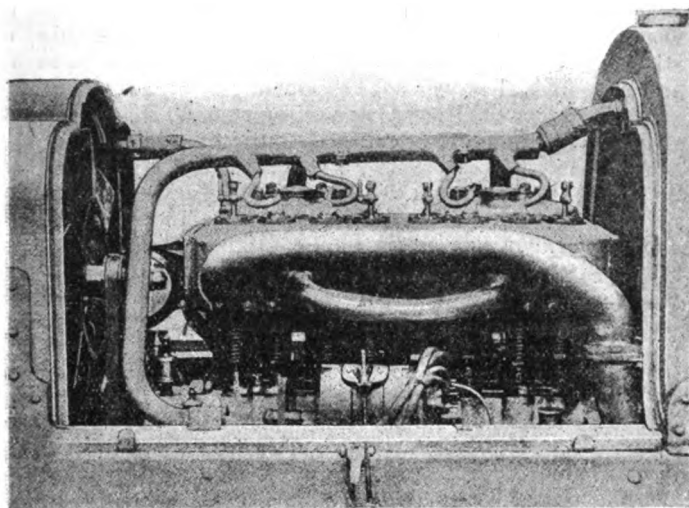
View of Valve Side of Mors 15-20-h.p. Engine.
